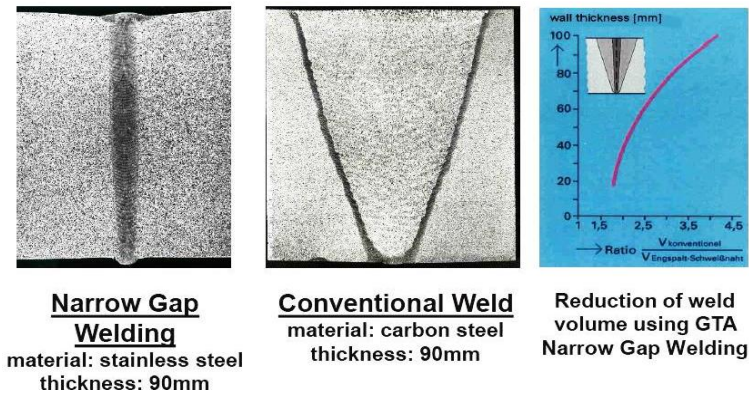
Reduction of the weld volume using NG-GTAW technique compared to a conventional V-groove weld. The reduction of weld volume, e.g. for 90 mm wall thickness, is a factor of 4 (Engelhard et al. 2000).
